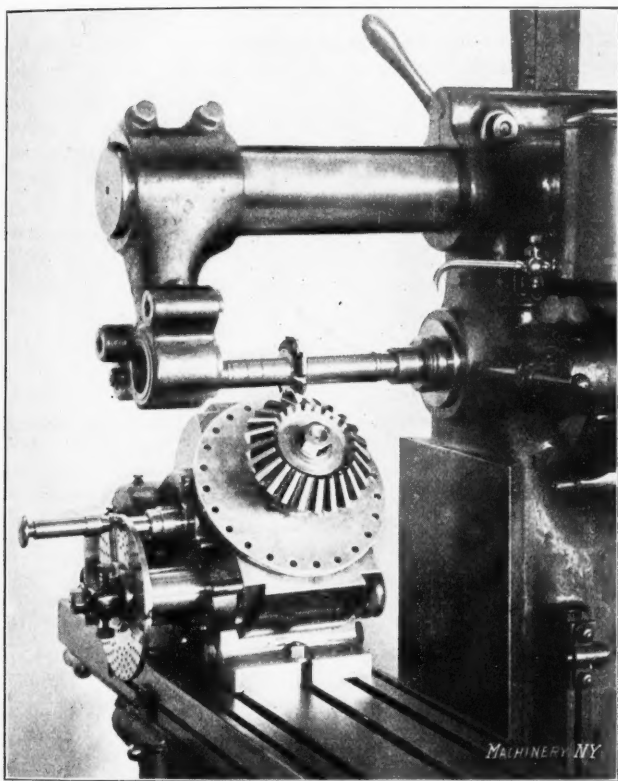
Milling Machine set up for Cutting a Bevel Gear
